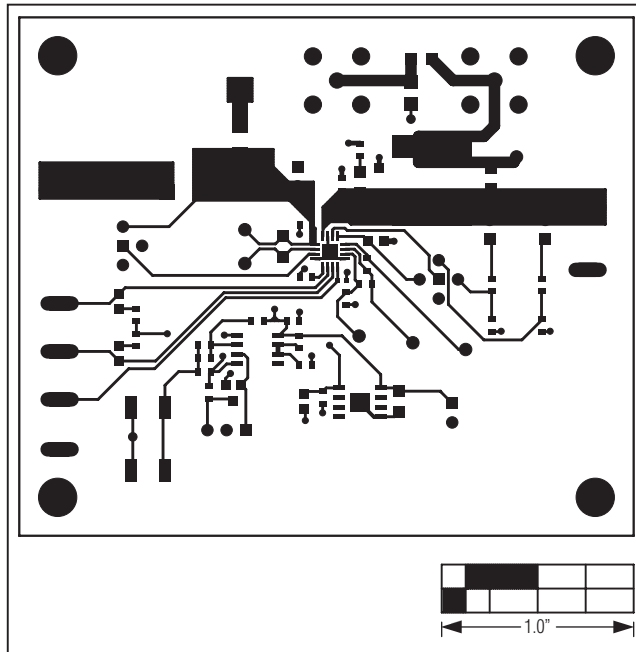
MAX16946 EV Kit PCB Layout—Component Side
